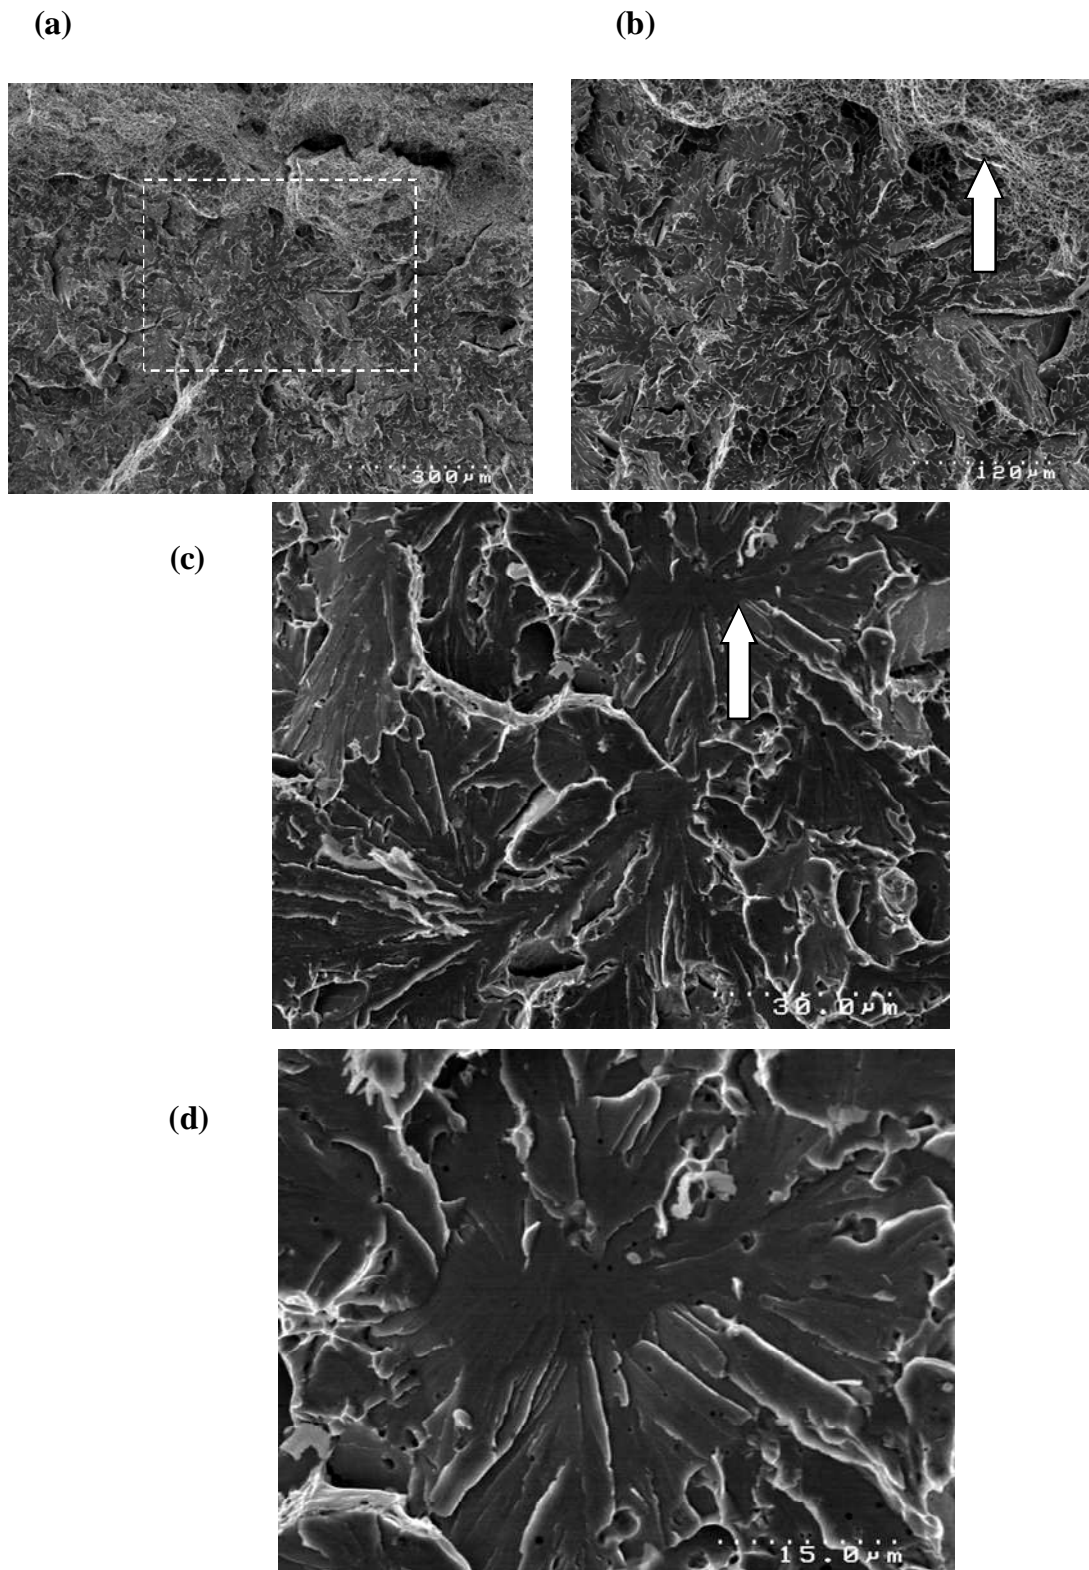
Weld N°2 Sample 33, ADAR; (a) general fracture surface, (b) magnification of framed area, (c) further magnification, noting the CIS.
